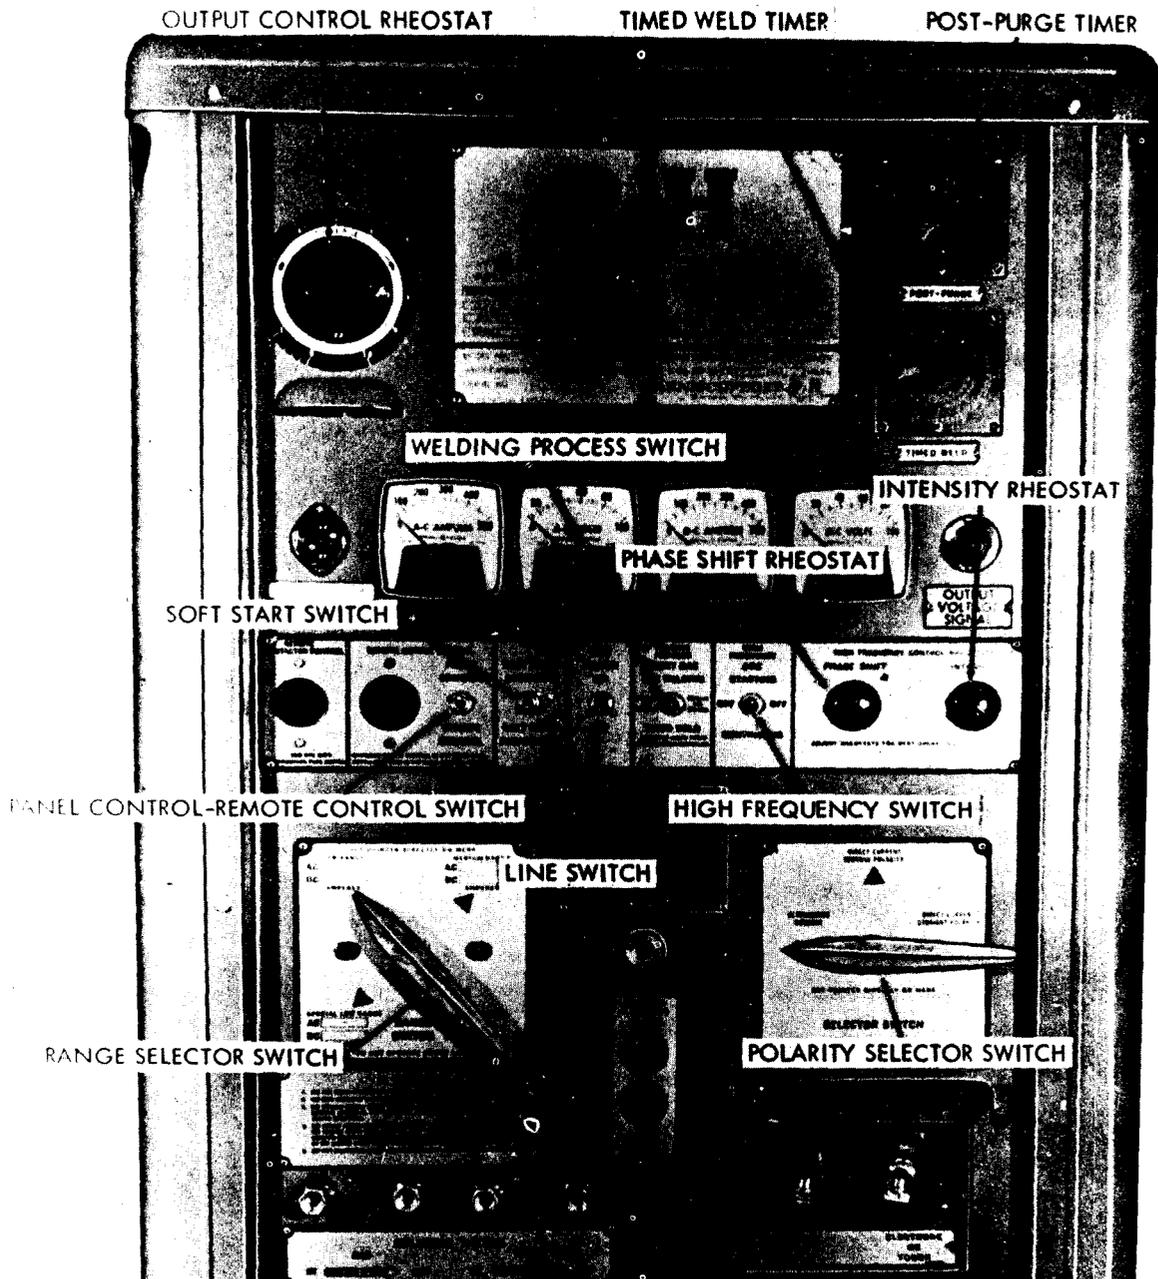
Stopping the welding machine, Model DAR-300HFSG.
